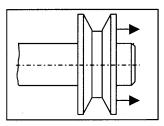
Pull Motion – Removing a Pulley from a Shaft
